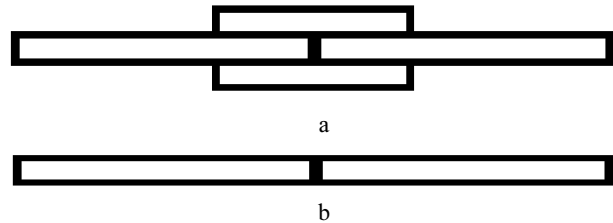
A schematic view of joints: a – joints with sleeve; b – butt joints
